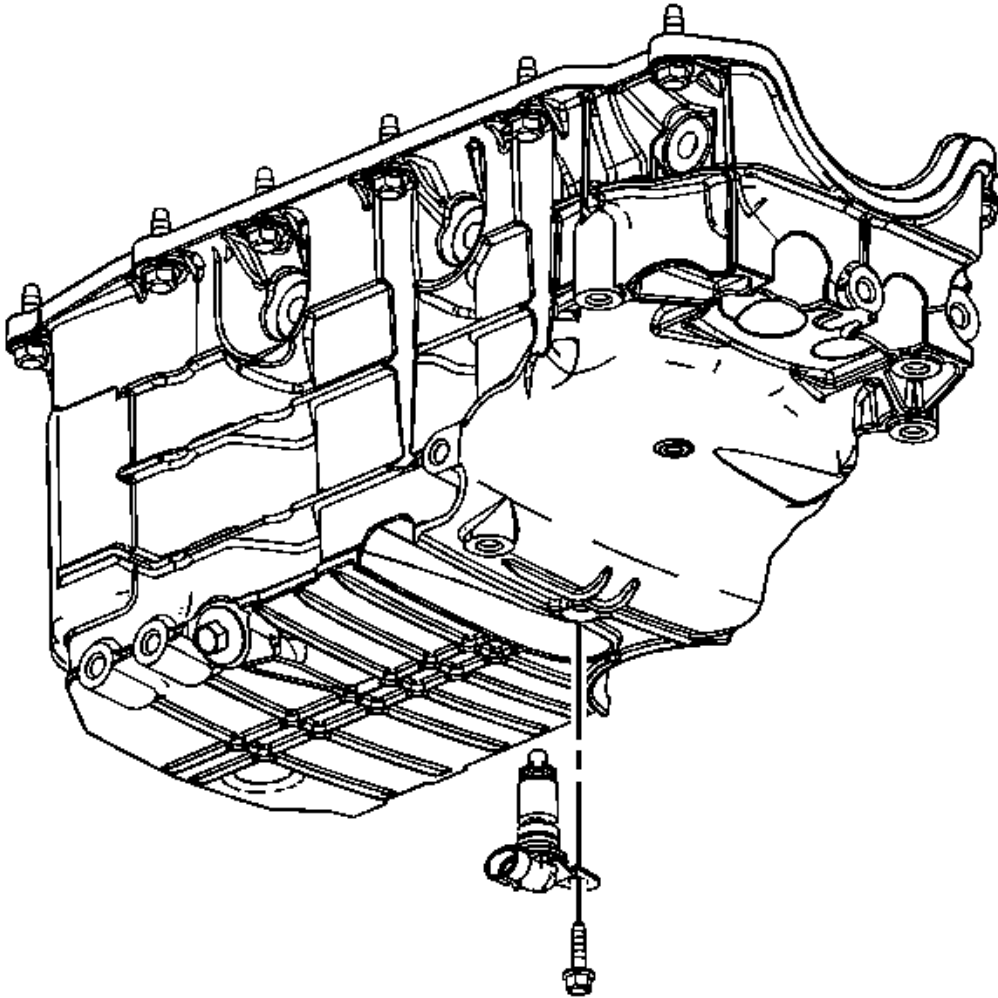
Identifying Engine Oil Level Sensor Bolt & Sensor
